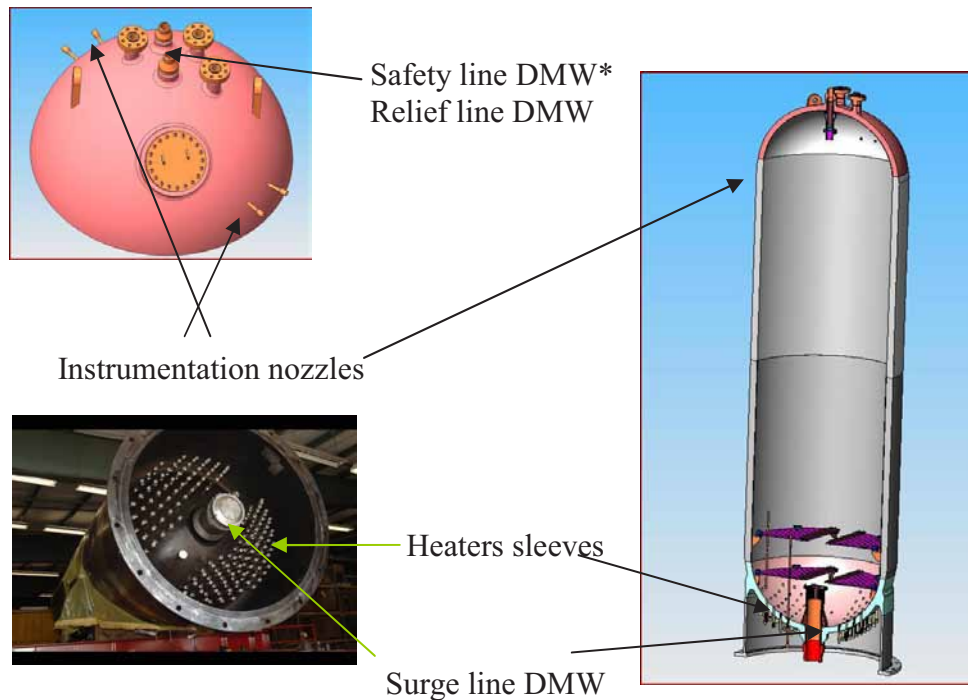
Pressurizer nozzles and heater sleeves in alloy 600 and alloy 82/182 (DMW: dissimilar metal weld).
